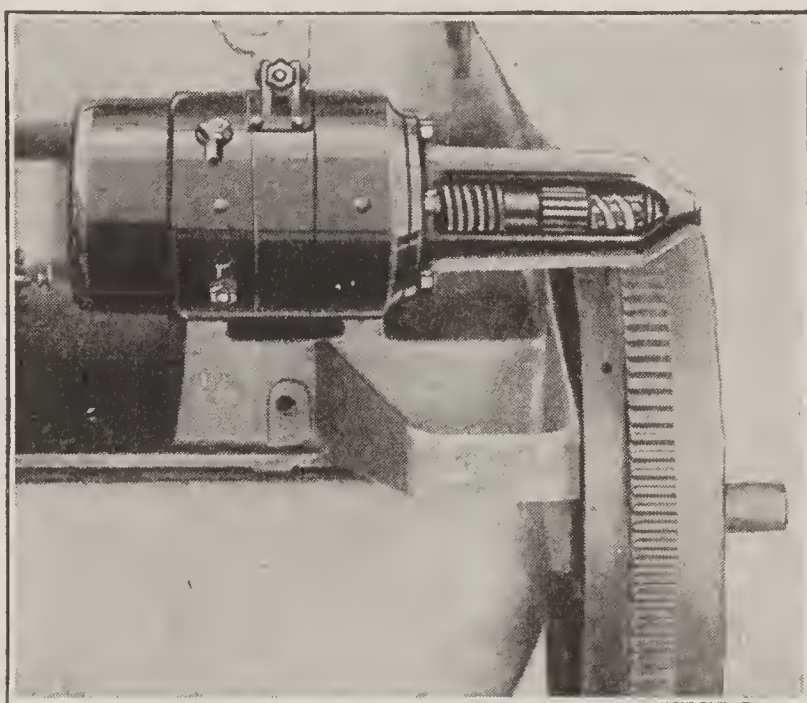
Automatic Engagement and Release of Starting Motor, Overland Engine
